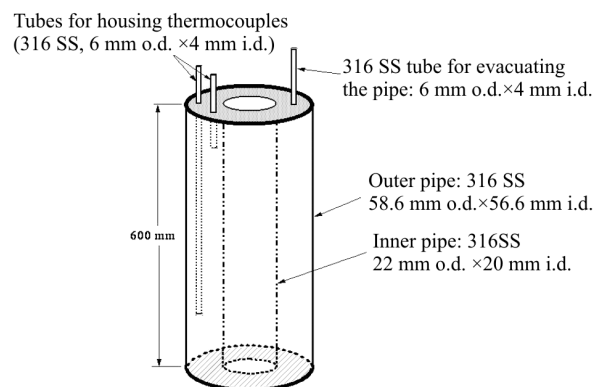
Dimensions and materials of the laboratory scale heat pipe container
